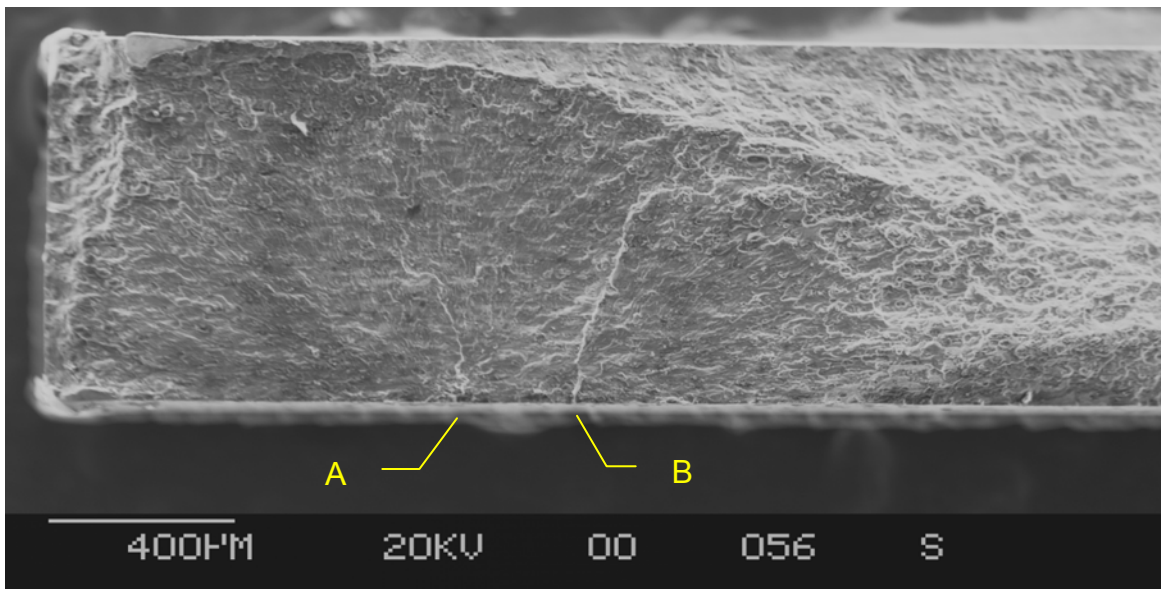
Fatigue Crack on Fracture Surface of Specimen 5969.
